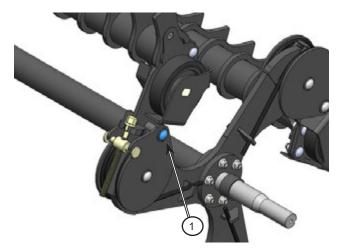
Tension until locking bolt is loose (Only reel shown for clarity)
